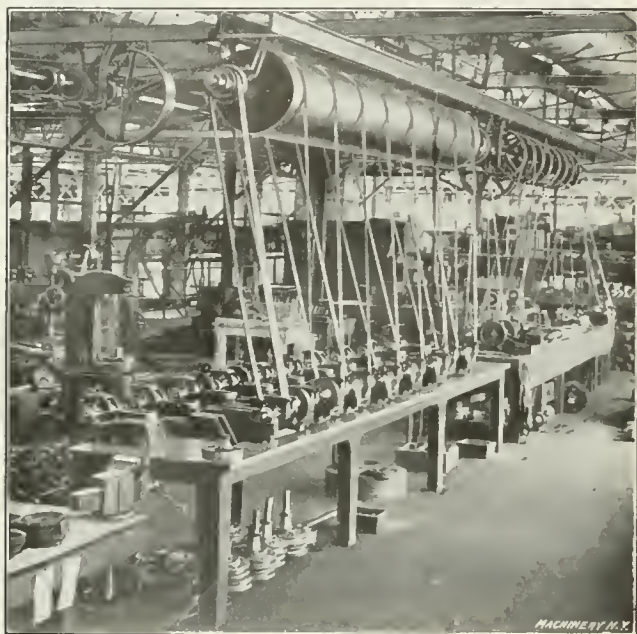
"Running in" Wheel Spindles prior to Assembling
